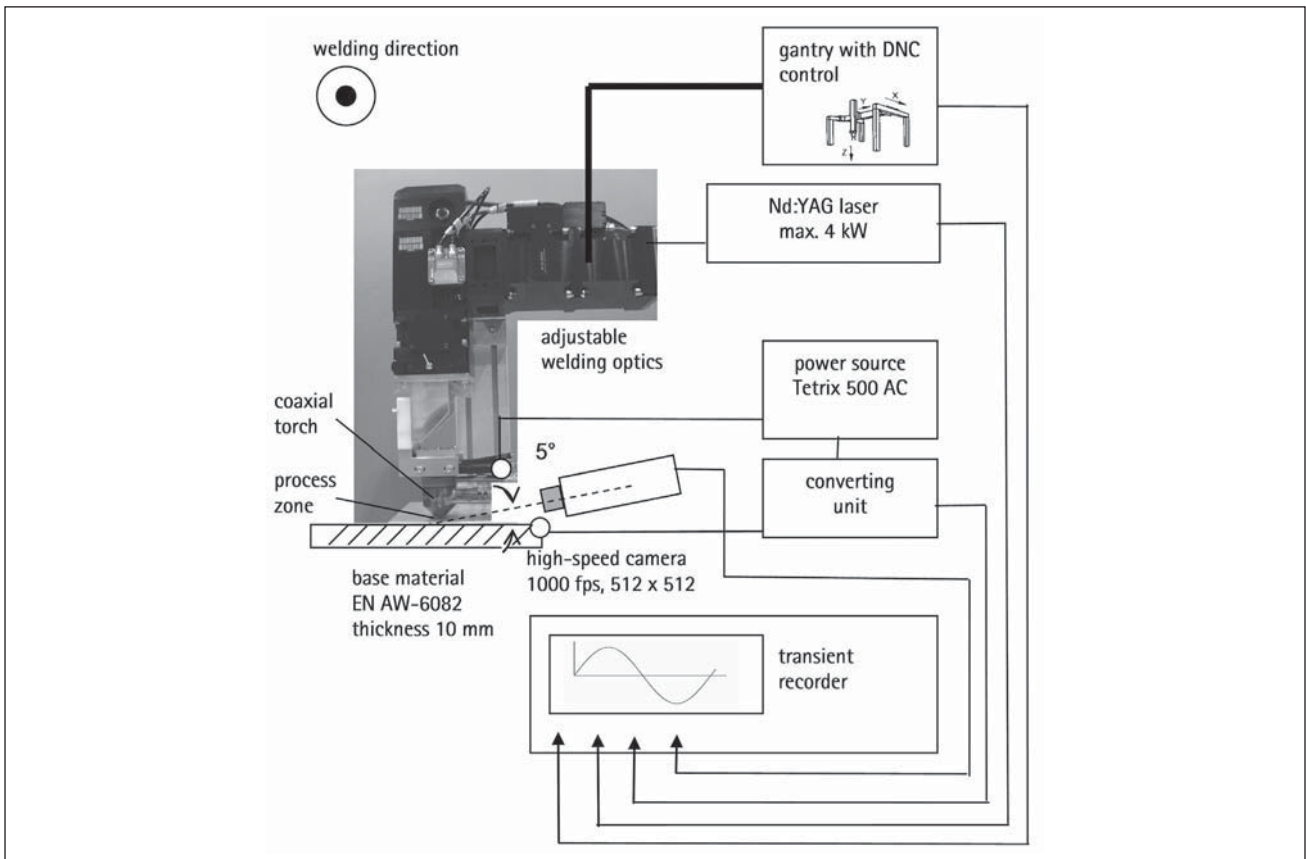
Principle arrangement for coaxial laser-plasma hybrid welding
